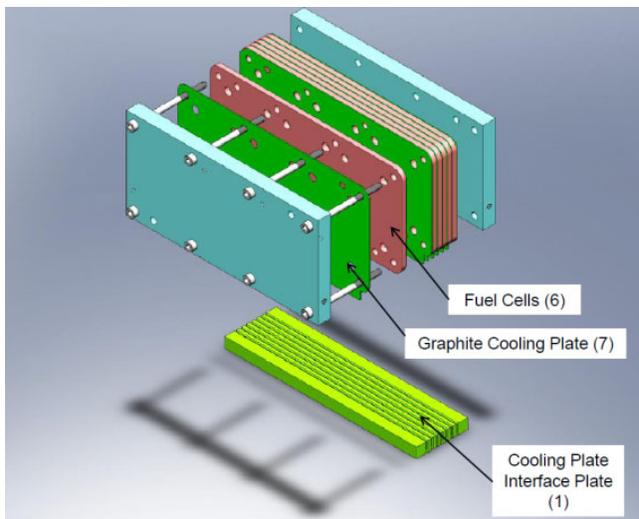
Exploded view of pyrolytic graphite cooling plate technology demonstration stack.
